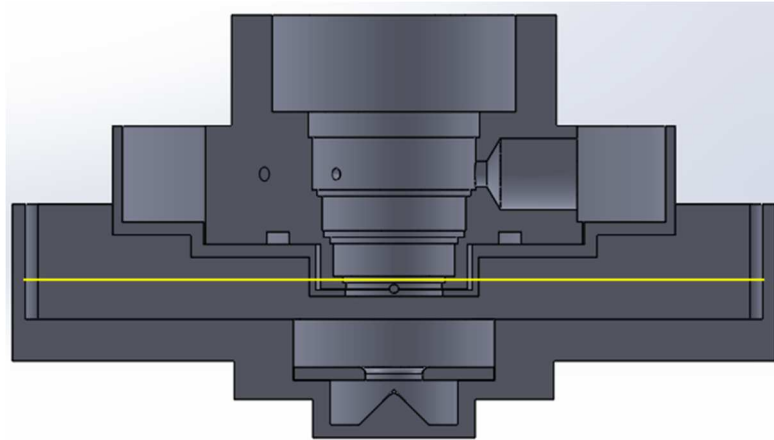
The Complete Test Arm Assembly with a Contact Lens
